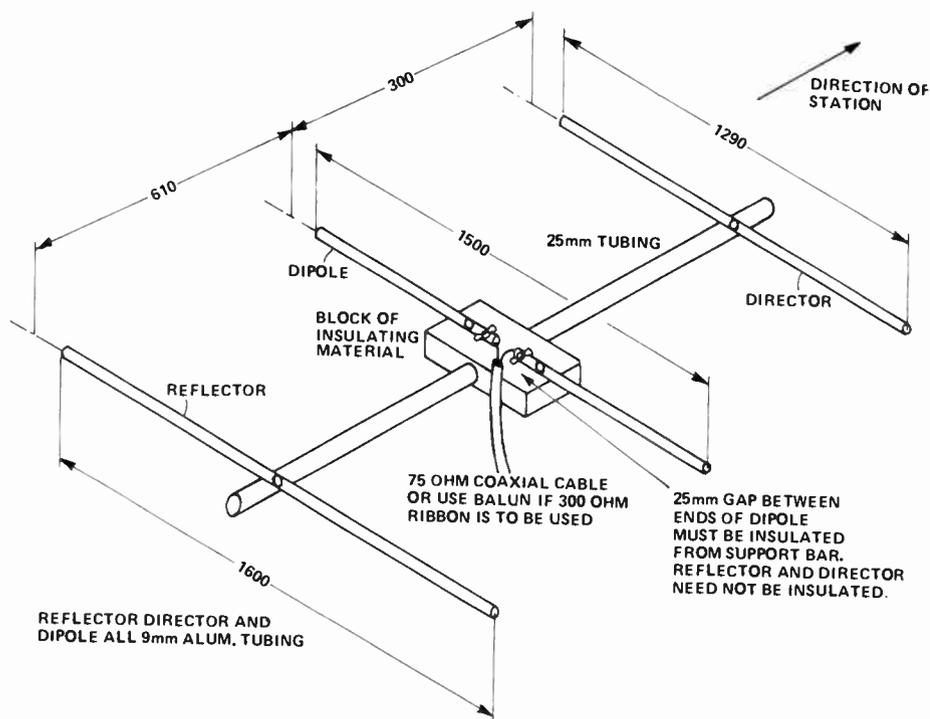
Main details of three element antenna – constructional methods may be altered but dimensions should be kept as shown.
